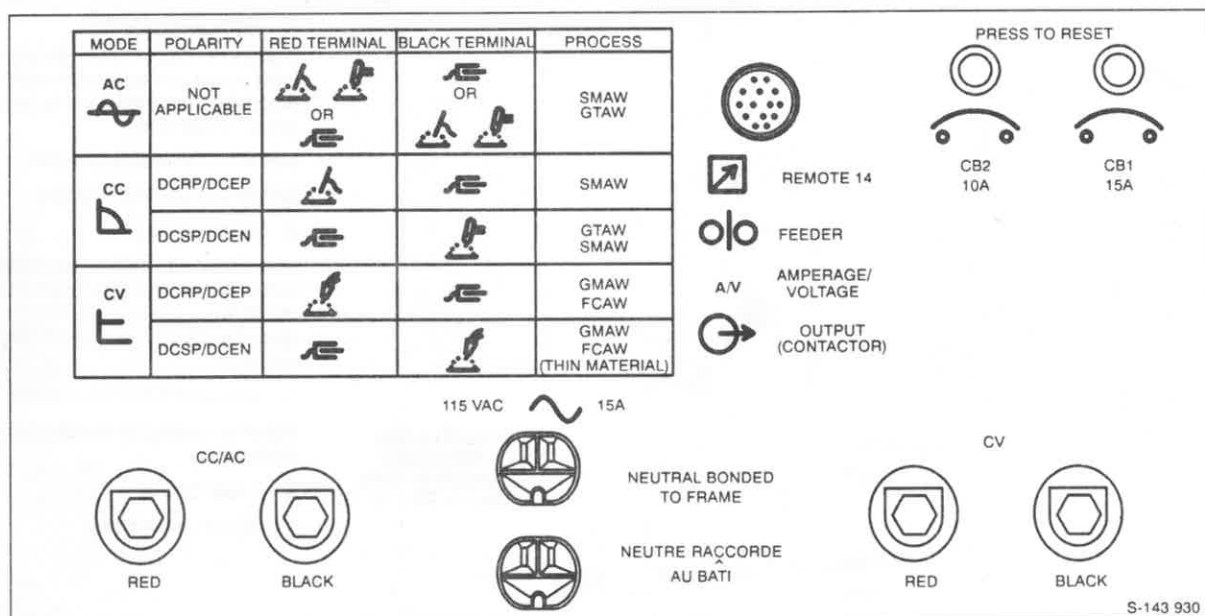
Selecting And Preparing Weld Output Cables
